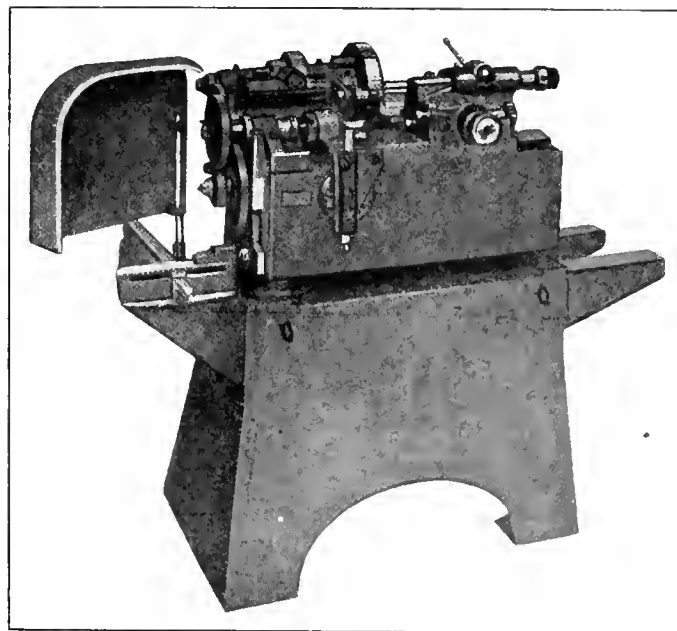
GENERAL VIEW OF PRECISION SCREW-CUTTING LATHE
